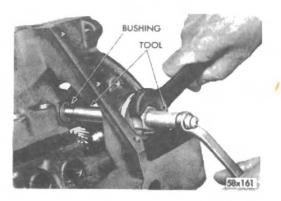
Burnishing Distributor Drive Shaft Bushing Using Tool CA-3053
